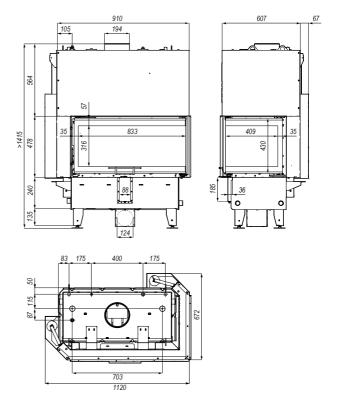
Projections with dimensions of DEFRO HOME RIVA ME G fireplace insert.
